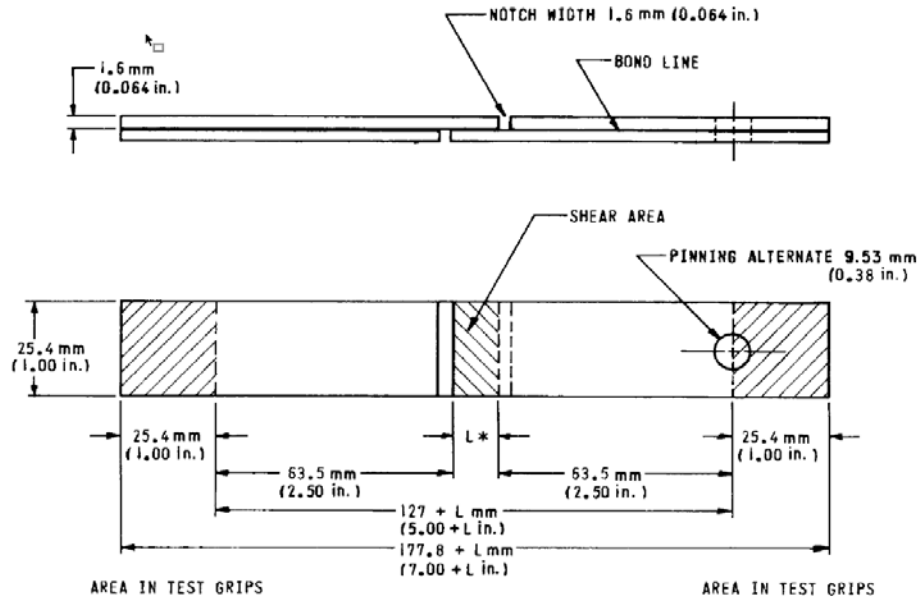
Dimensions of shear testing samples according to the ASTM D 3165-00 standard
